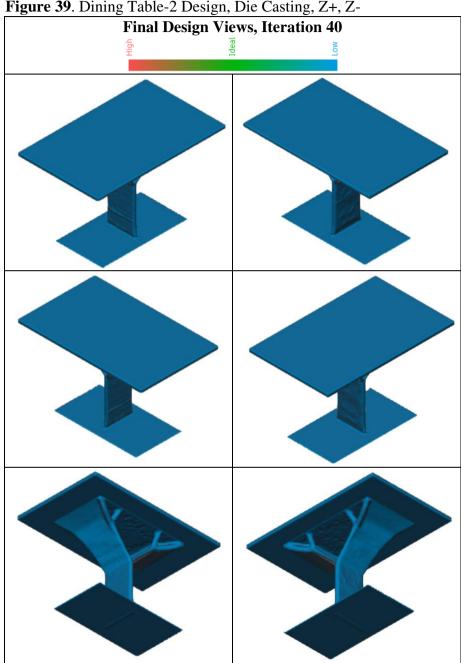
Dining Table-2 Design, Die Casting, Z+, Z-
